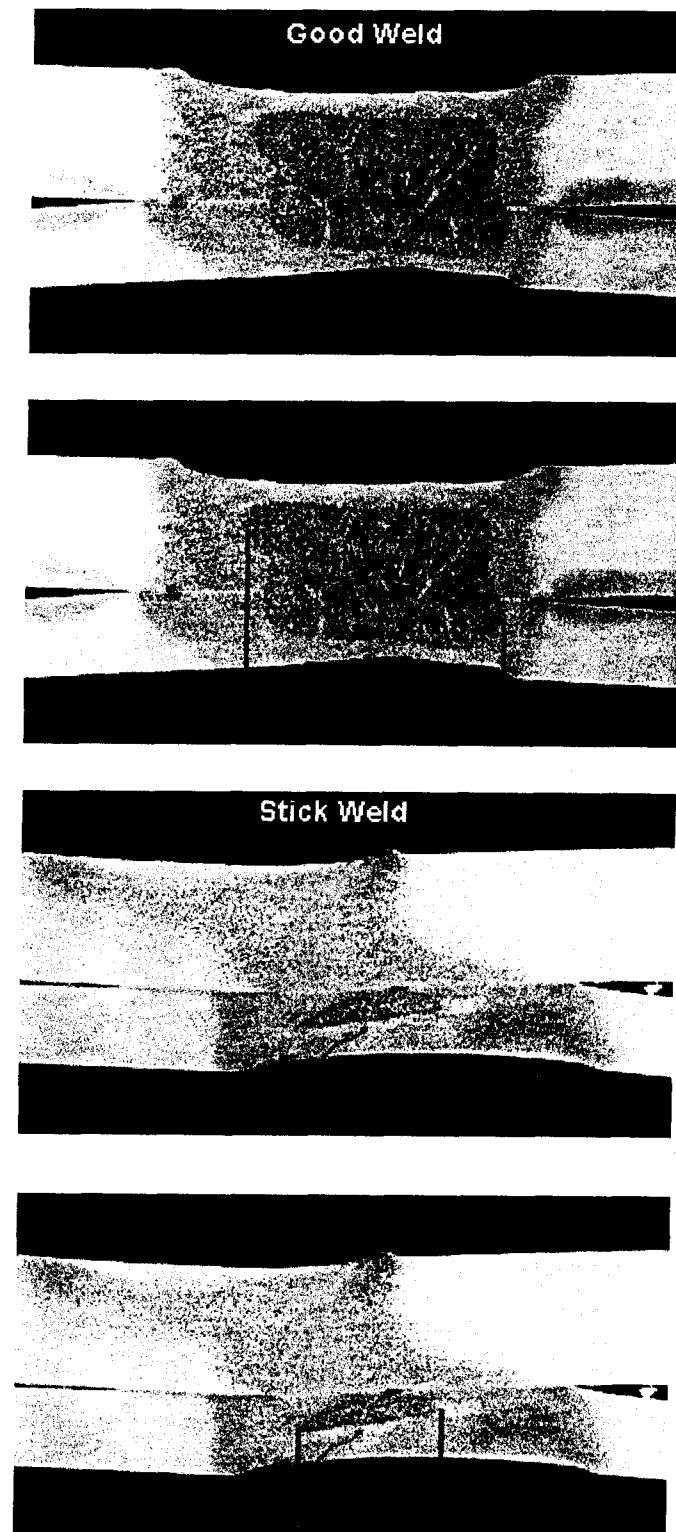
Metallographic cross-sectional views of welds. The first two pictures show good weld and its effective size; the last two pictures show bad weld with weak adhesion strength.
